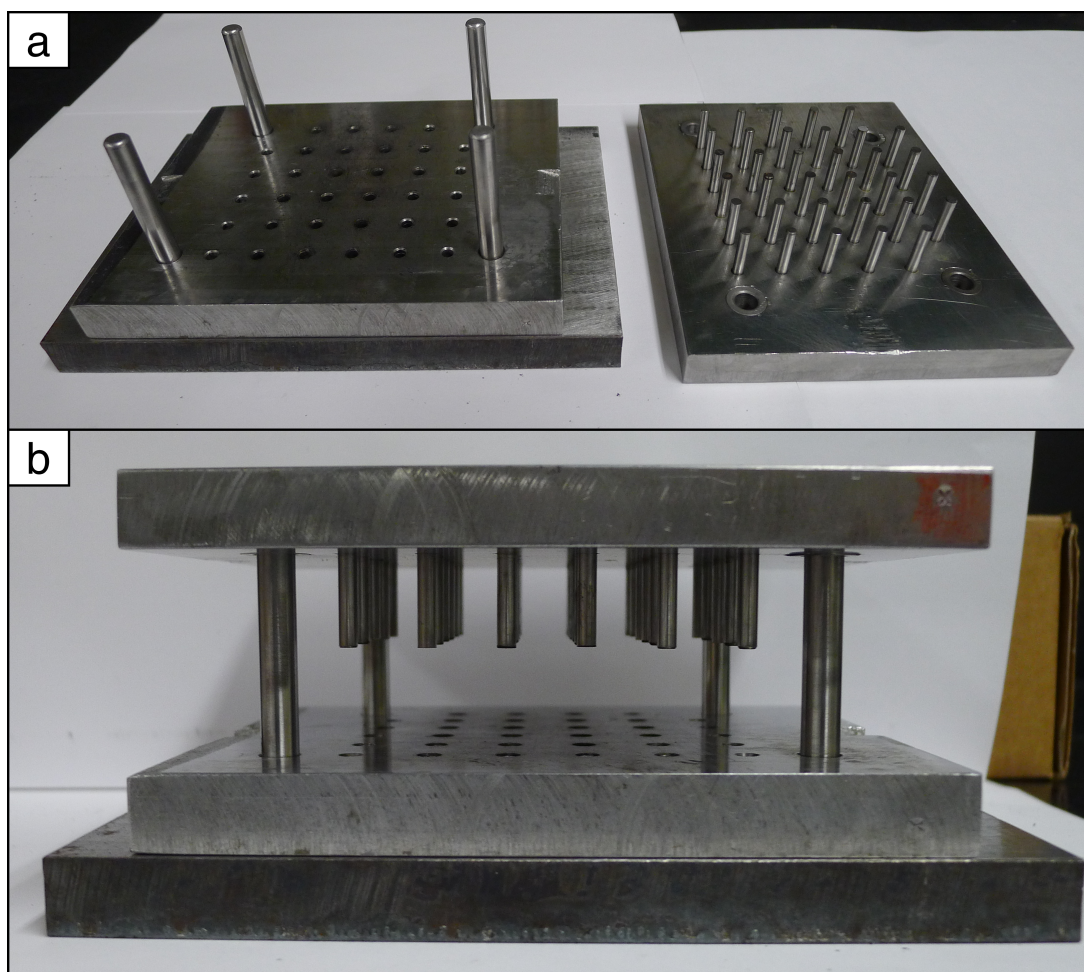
(a) Top view and (b) side view of the pellet press used to pelletize C/ETS-10
